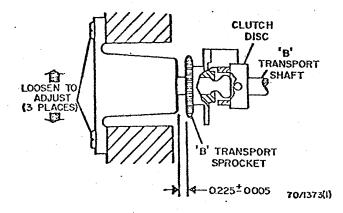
Concentricity of B Transport Sprocket Assembly
